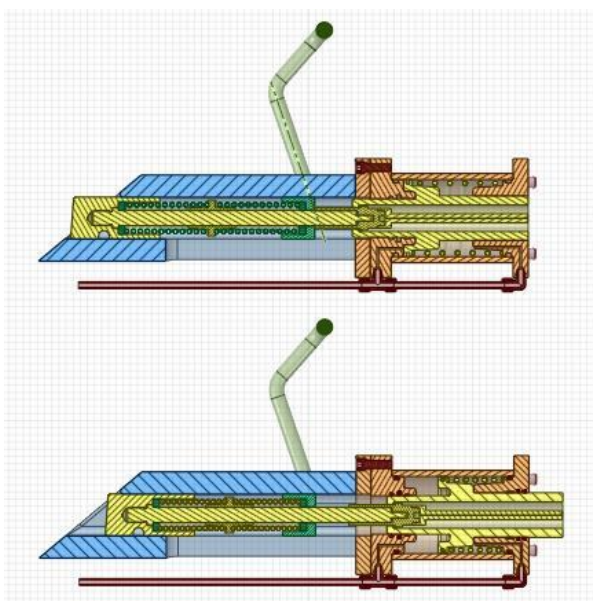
Hydraulic Actuator System and Locking Mechanism assembly (see Ref. \9\)
